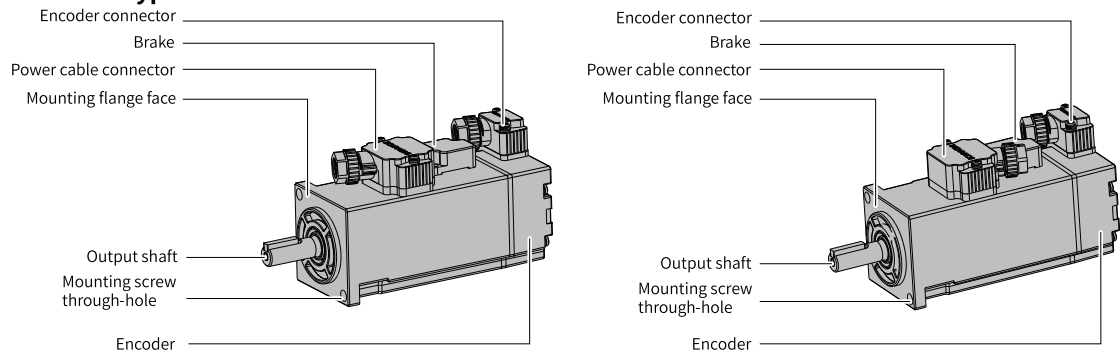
Components of a terminal-type servo motor (Left: motor with front cable outlet; Right: motor with rear cable outlet)
